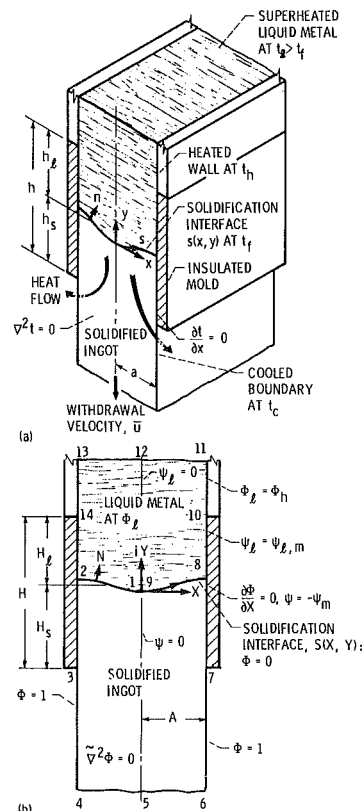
Slab ingot being withdrawn from mold in continuous casting: (a) physical geometry; (b) geometry and boundary conditions in dimensionless physical plane
